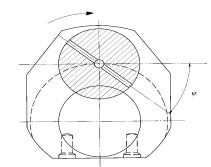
Sectional view of the crankpin in way of oil bore
